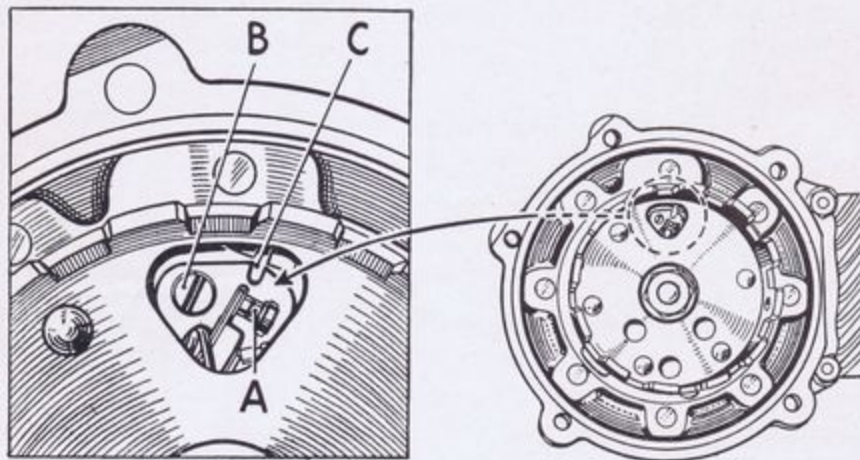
Adjusting the Contact Breaker Points (Lucas).
